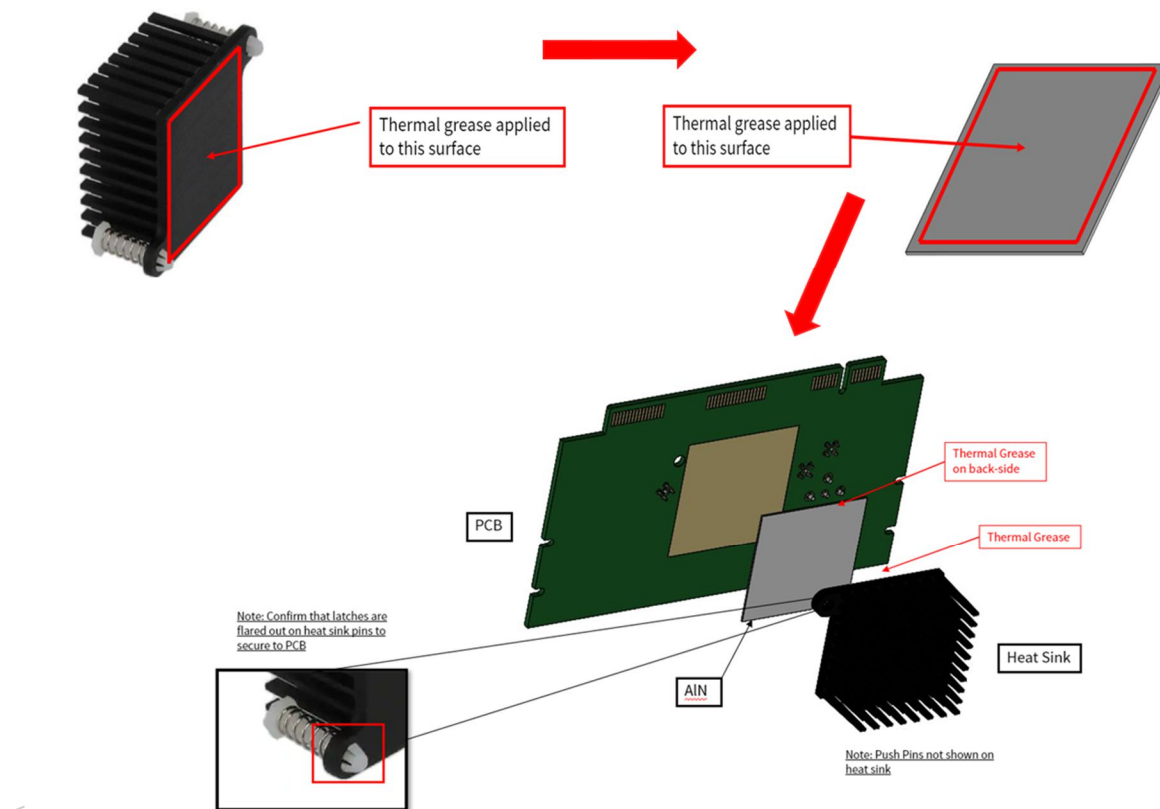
ASSEMBLY PROECEDURE FOR MOSFETS AND HEATSINK
